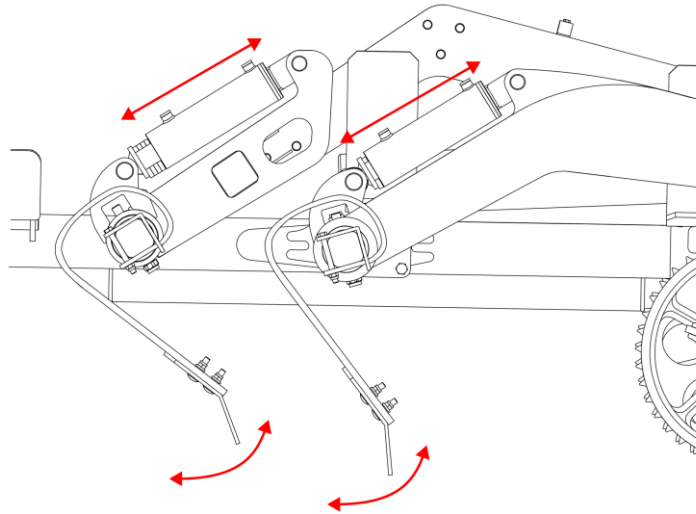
Adjustment of the harrow tine angle of attack (hydraulic adjustment version)
